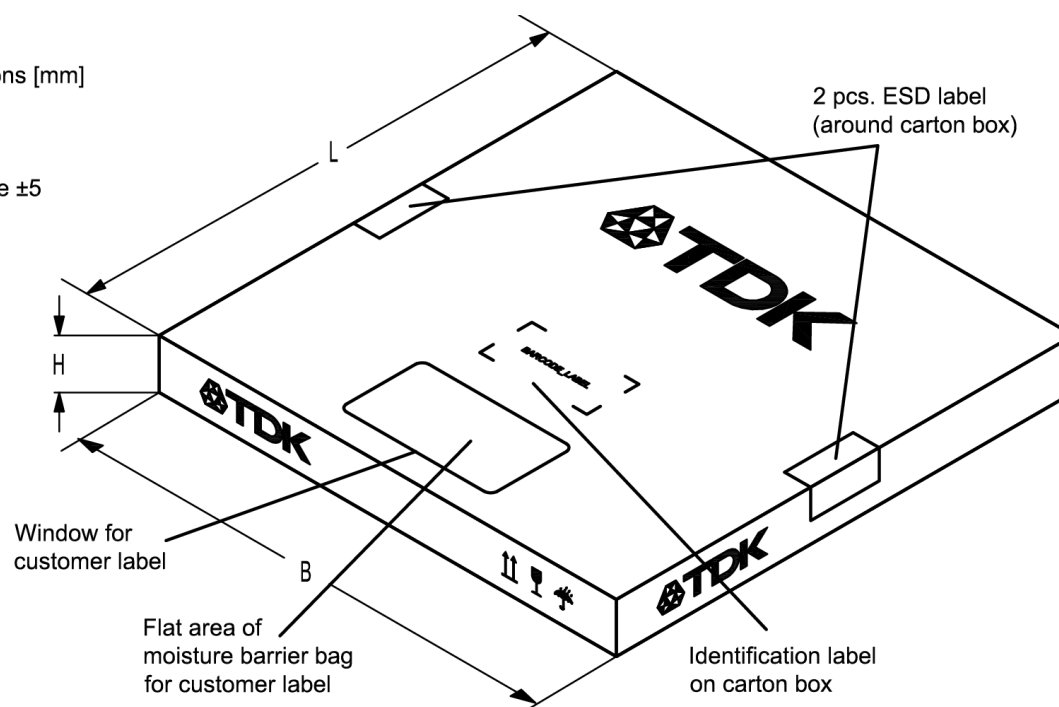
Drawing of folding box for reel with diameter of 180 mm.
